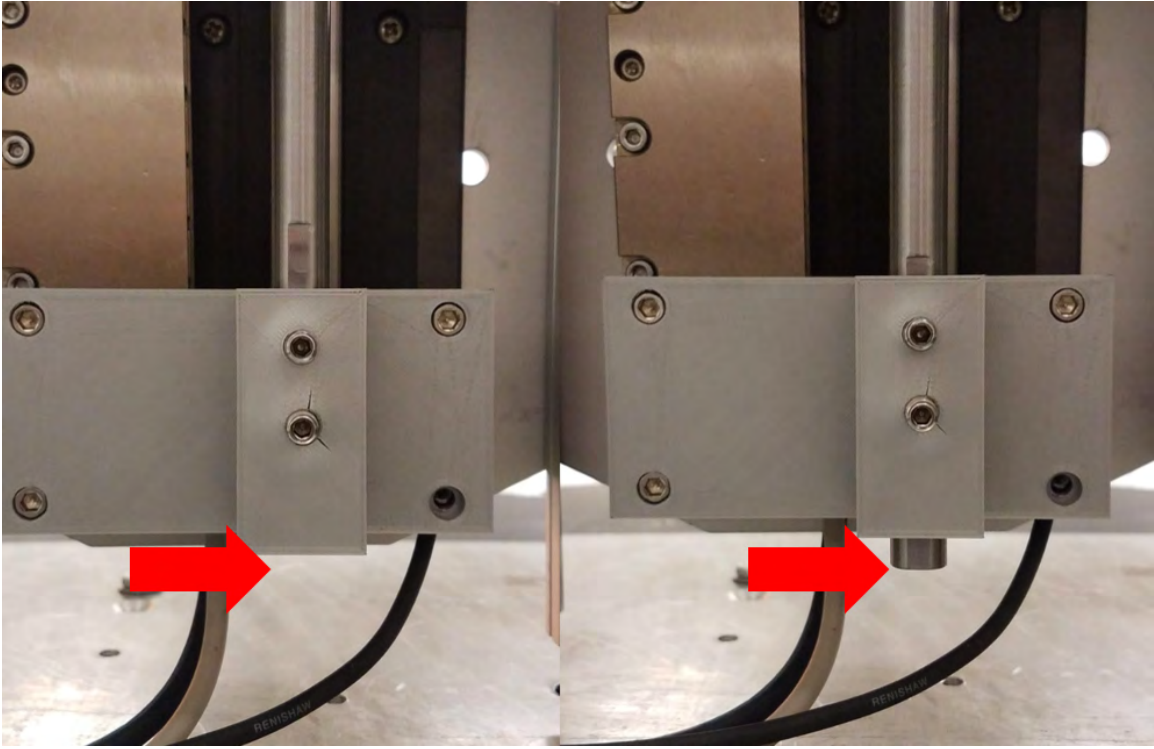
Mounting block connecting the vertical rod and the linear motor, and the arrows show how the height of the rod can easily be adjusted
